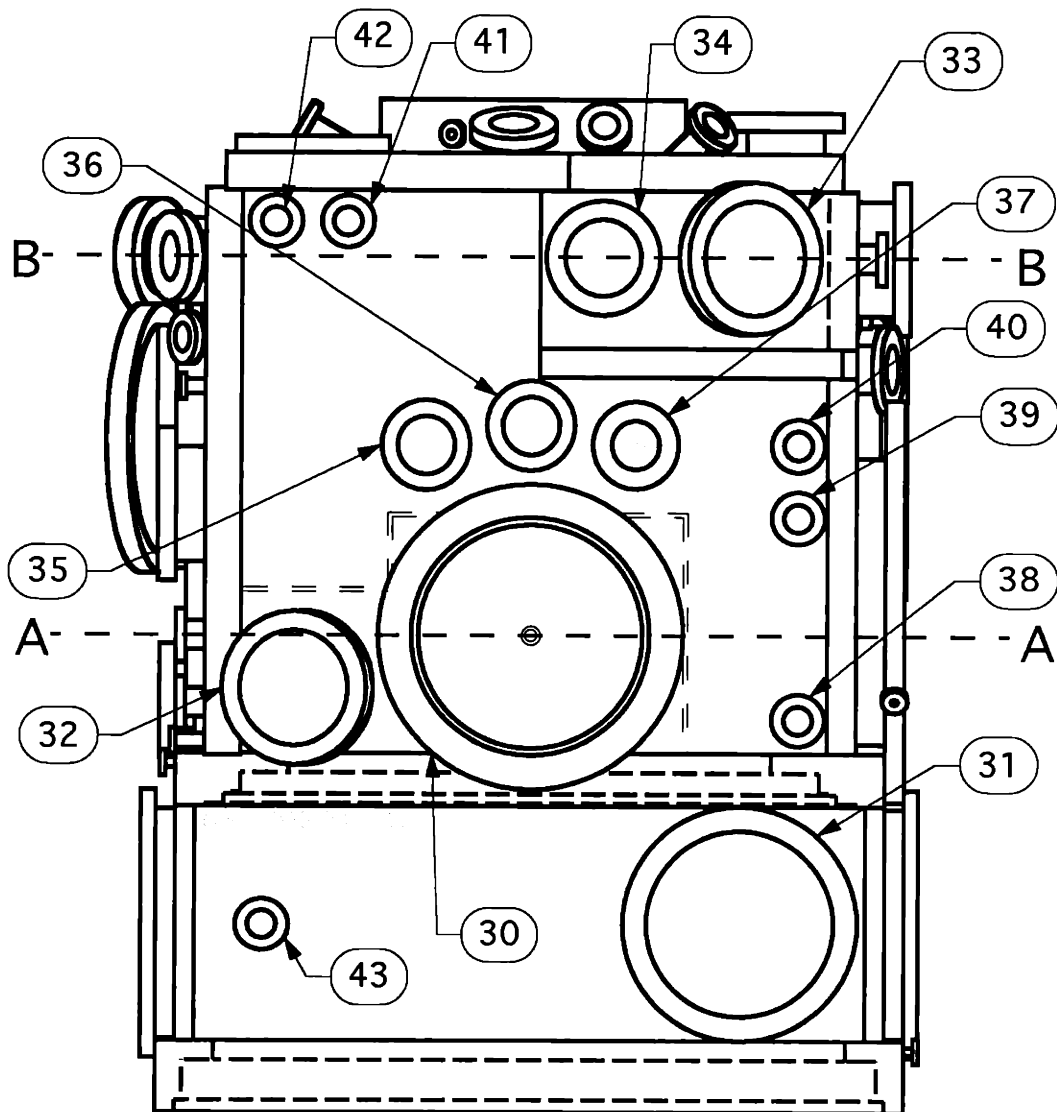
External layout of the Source side of the primary welded assembly. Dashed lines A-A and B-B indicate the beam scattering and surface spectroscopy heights, respectively.
